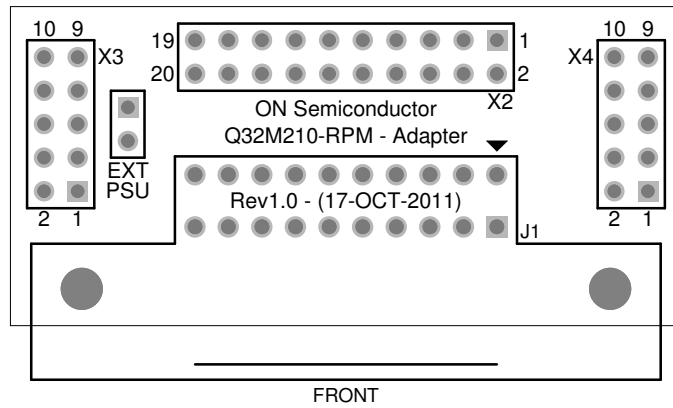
Adaptor Board Component Placement Drawing (Top View)
